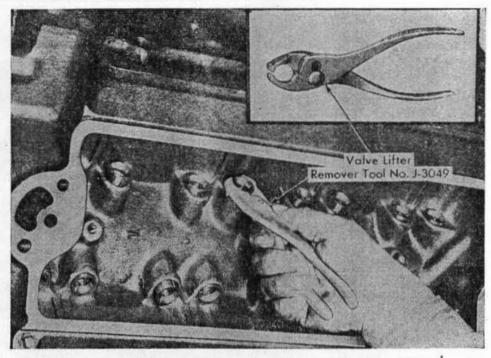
Showing special pliers used to remove stuck valve lifters from 1949-54 engines
